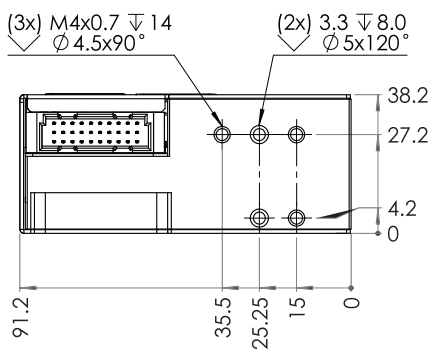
Mechanical dimensions – front panel (without faceplate)
